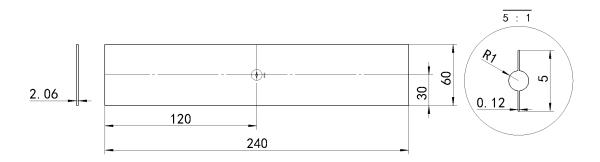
Dimensions (in mm) of the middle cracked tension (MT) specimens for FCG tests.
